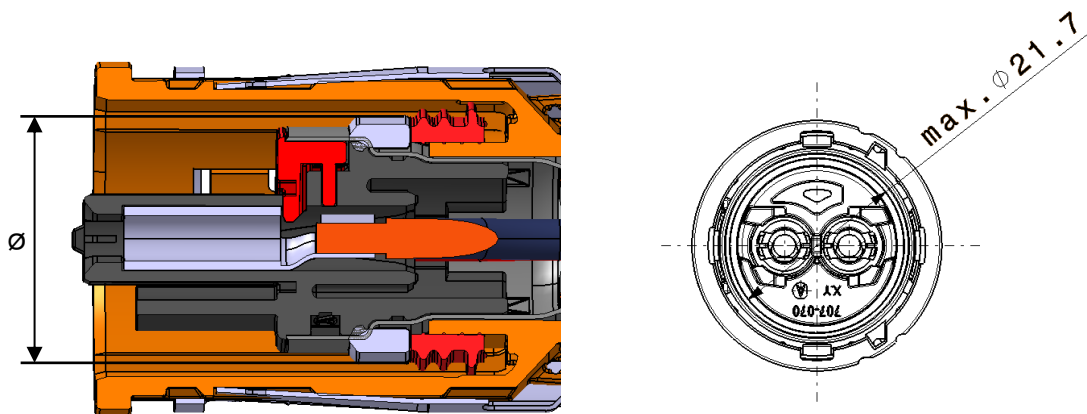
Assembly position of the ASSY Plastic-Housing
